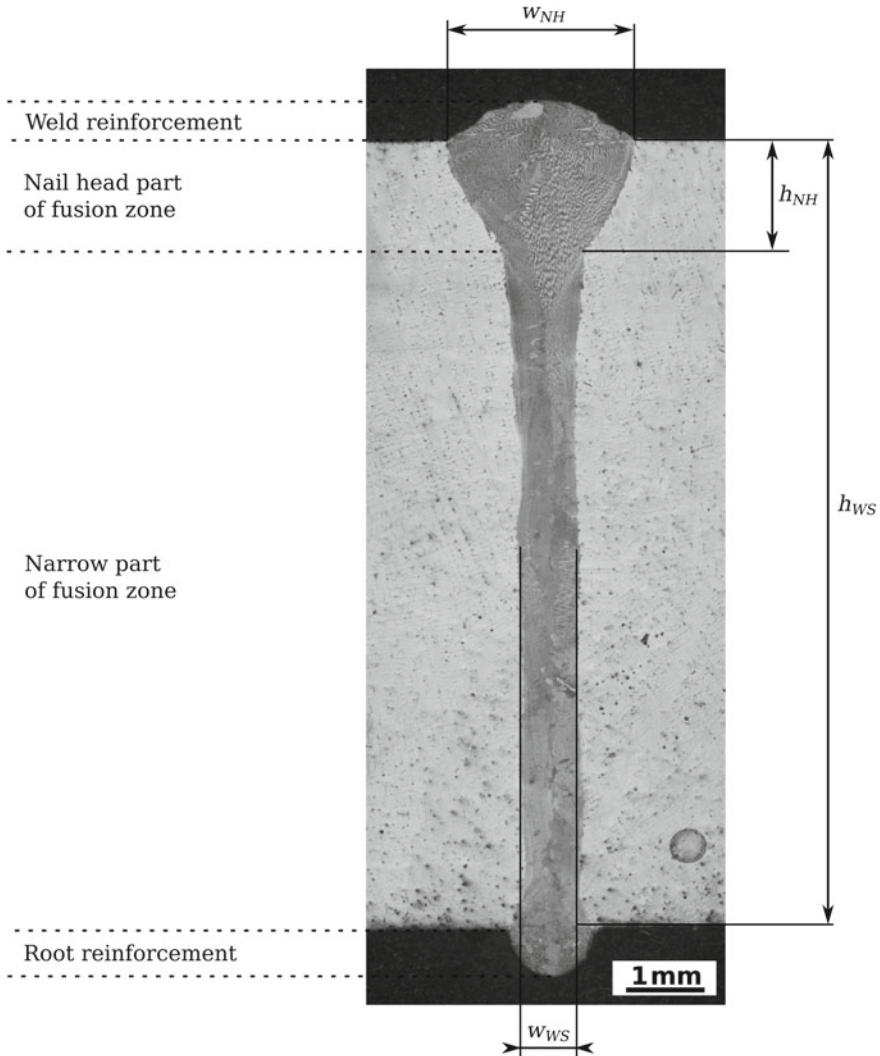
Cross section of the experimentally obtained EB welding seam with definitions of fusion zone areas and dimensions [37]
